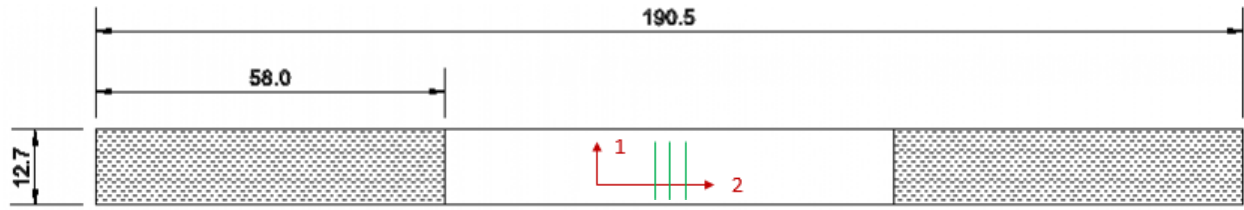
Typical 90-degree tension specimen geometry and layout (dimensions in mm).
